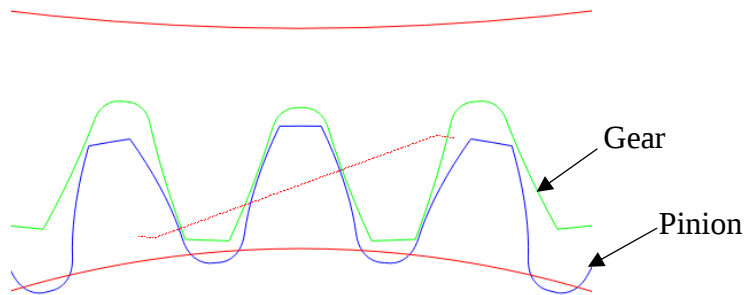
Gear Mesh of Gear Pair of 45 and 63.
